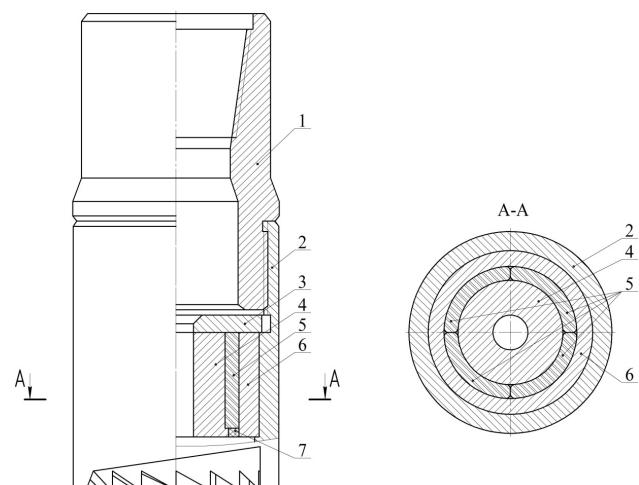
Schematic diagram of a magnetic fishing tool: adapter (1); housing (2); cover (3); central magnetic core (4); permanent magnets (5); peripheral magnetic core (6); resin (7)
